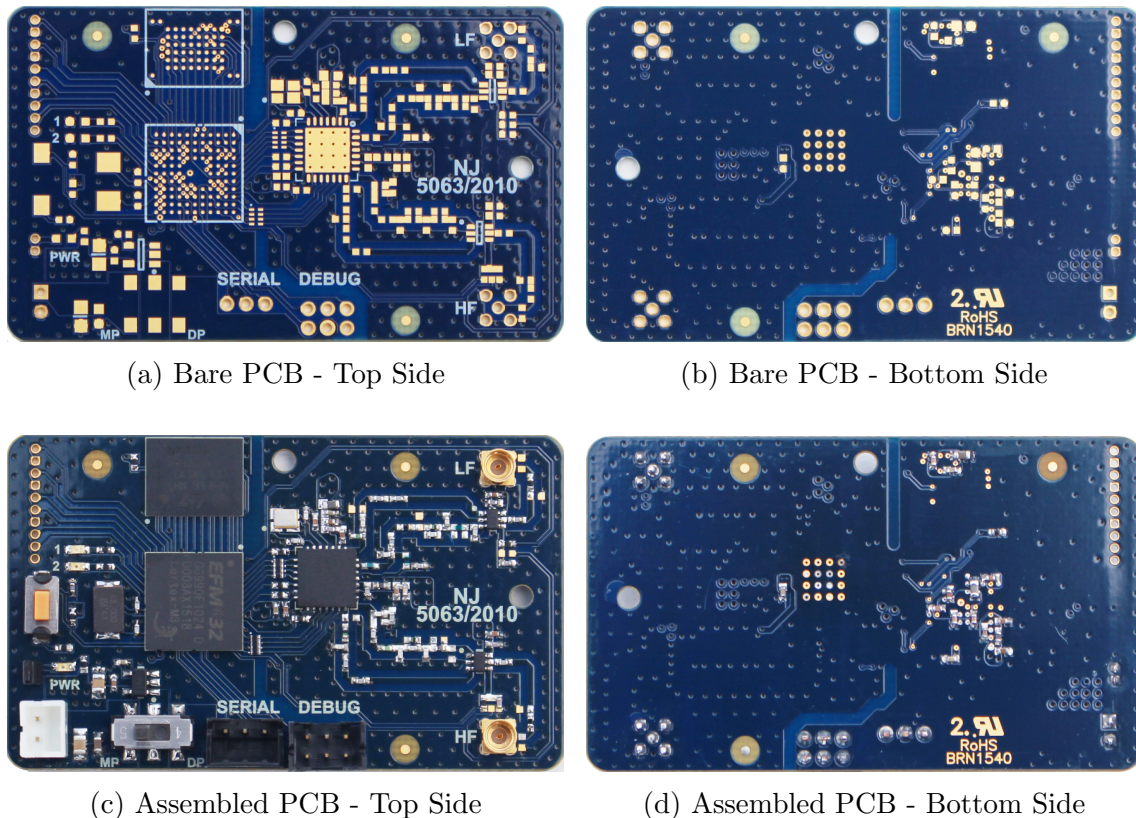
The physical appearance of top and bottom side of a bare and assembled PCB.
